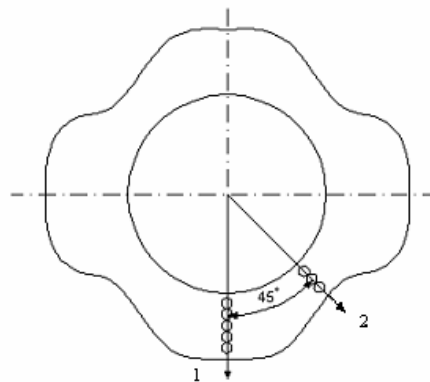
Exaggerated view of the flange of a cylindrical deep drawn part:
